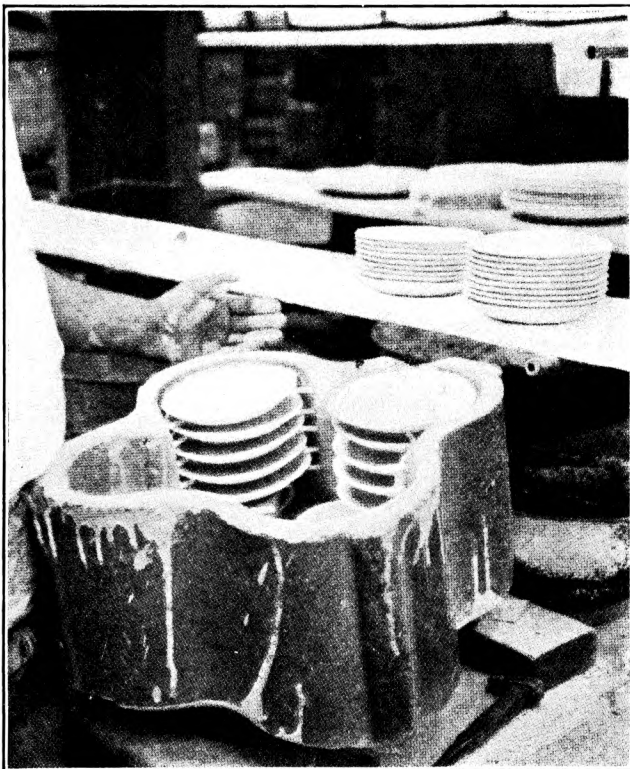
GLOST SAGGERS BEING FILLED WITH FLATWARE. PINS OF BURNED CLAY ARE PLACED UNDER EACH PIECE OF WARE
